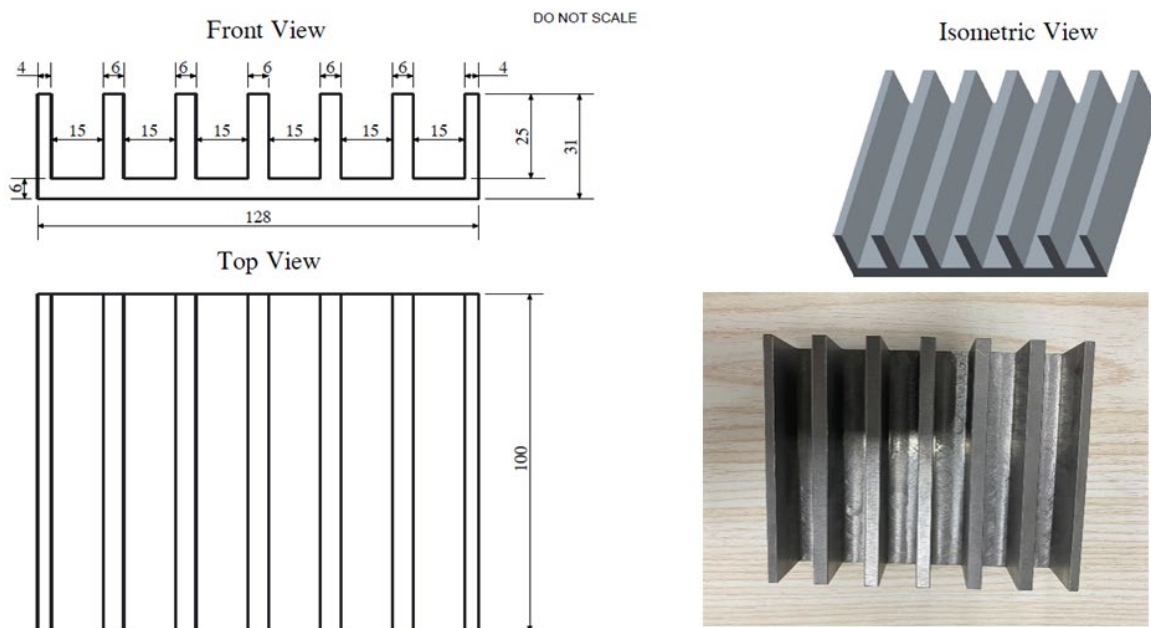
Layout drawing and photo of bare motorette frame employed for the thermal experiments. The unit shown in layout drawing is millimeter (mm).
